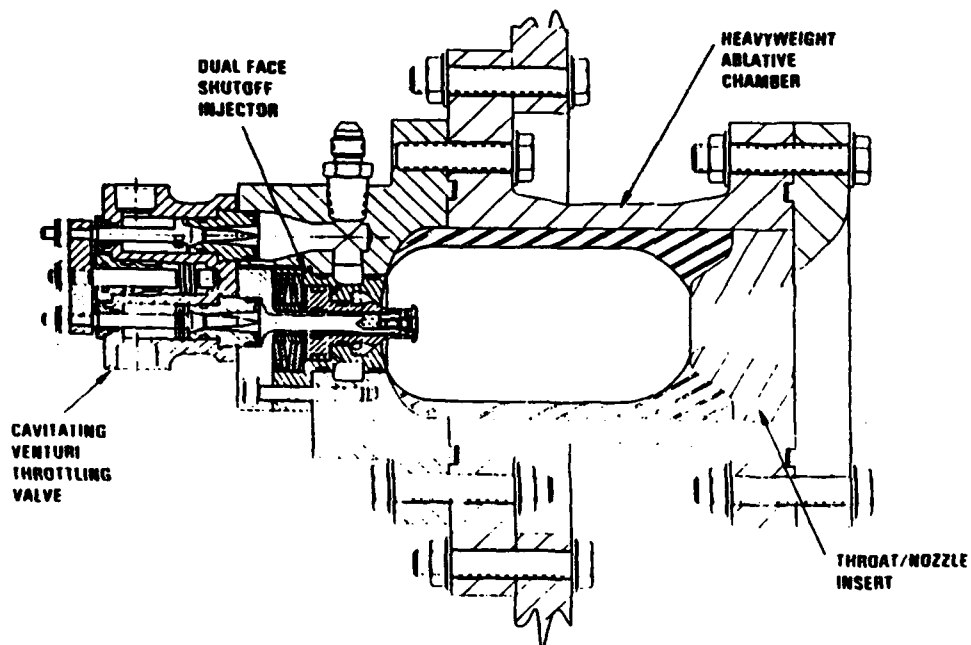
Engineering sketch of a gel engine developed by TRW Inc. with a face shut off injector and a throttling valve.
